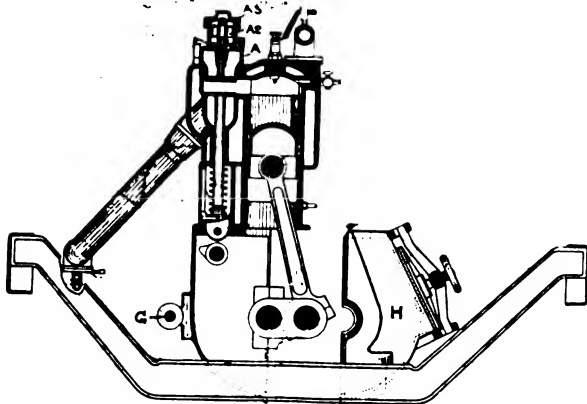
The 25-h.p. Winton Car. Transverse section through the engine showing, on the right, one half of the crank-chamber, H, removed from its normal position. The crank-shaft is held by independent bearing caps so that this may be done without affecting the alignment.
